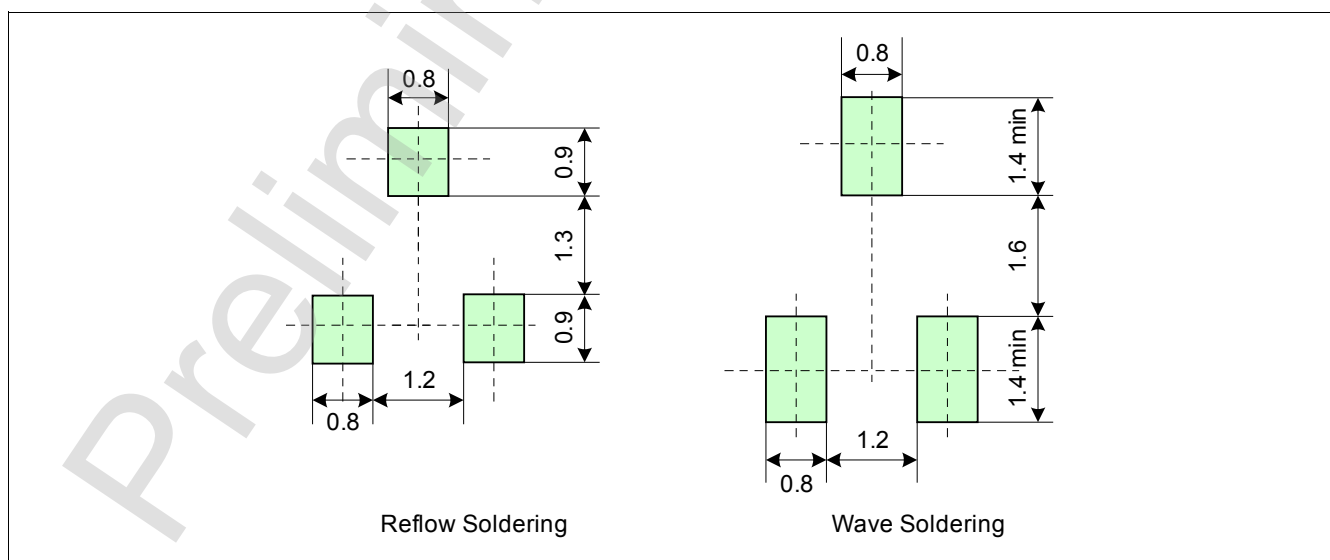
Footprint PG-SC59-3-5 and PG-SOT23
